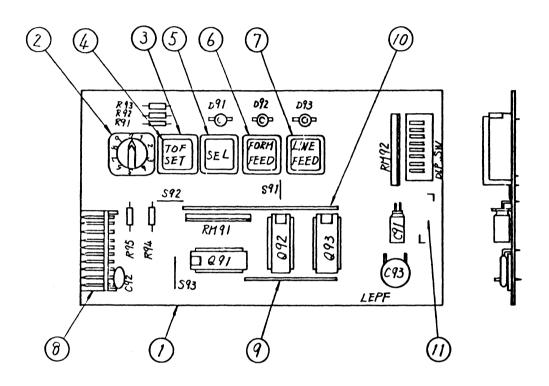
LEPF Circuit Board Assembly (LY-40069)
